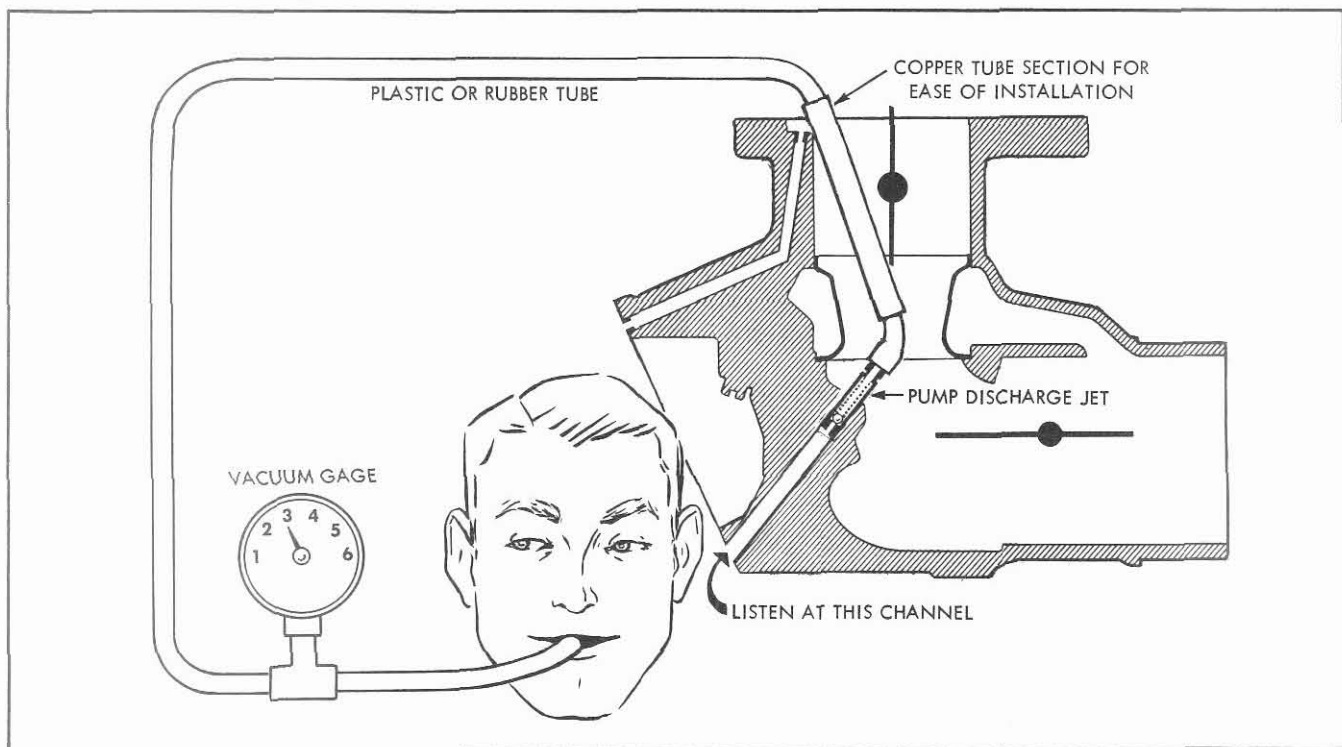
Checking Opening Pressure of Pump-Check Valve
